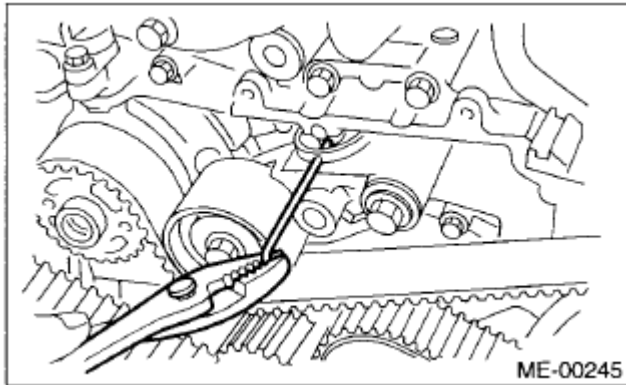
Removing Stopper Pin From Belt Tension Adjuster
